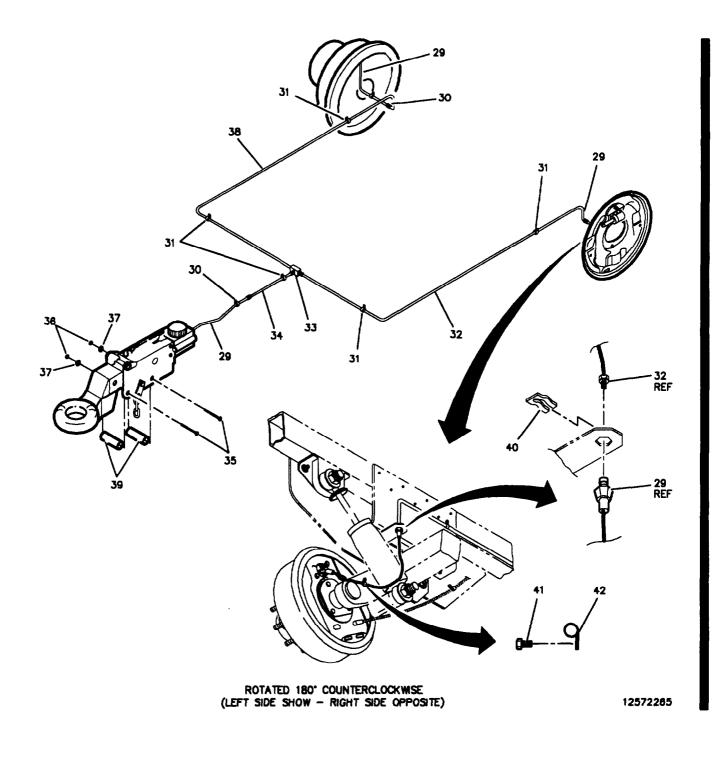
Brake Actuator Assembly (Sheet 2 of 2)
